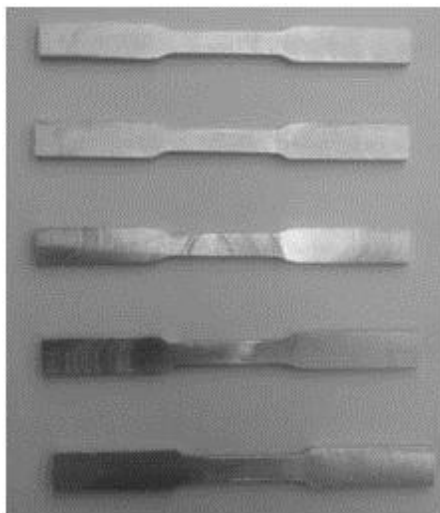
Shape of Samples After Cutting For Tensile Test
